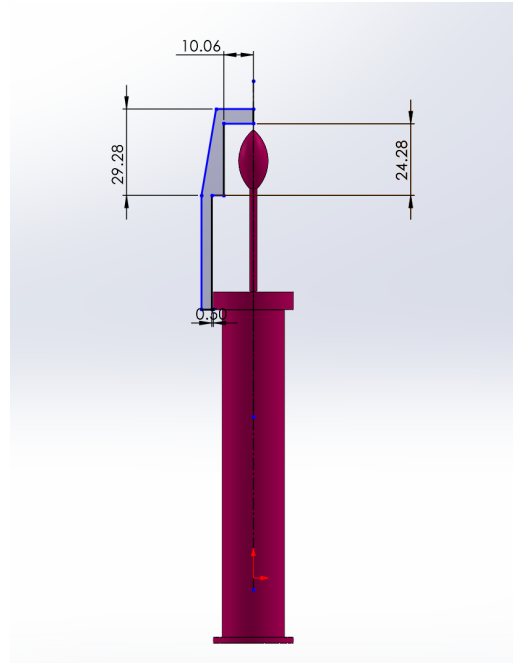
SolidWorks drawing of cap prior to being revolved with the swab fully enclosed while the plunger is fully deployed.
